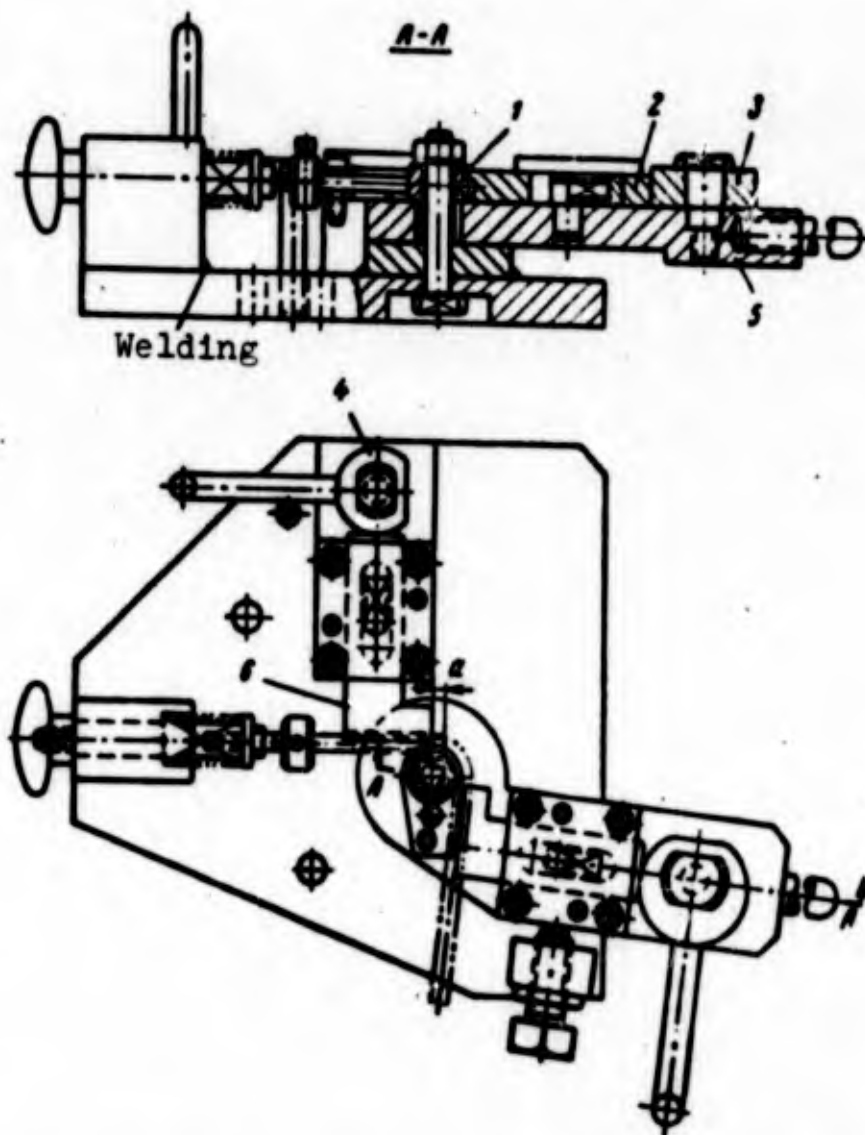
Device for bending pipes in one plane. 1) bending die; 2) clamp; 3, 4) eccentrics; 5) turning lever; 6) clamp.
